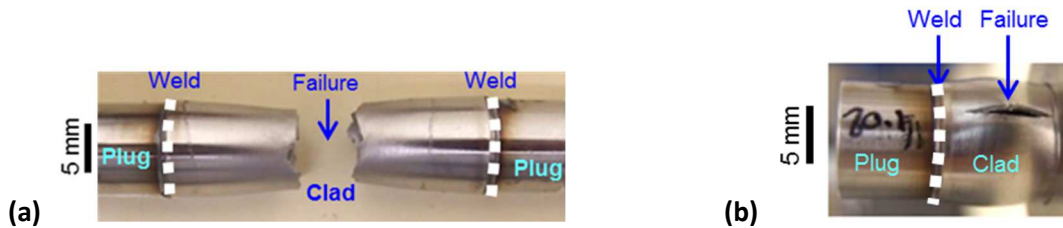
Image of a 14Cr end-plug/clad/end-plug welded sample after a tensile test (a), and image of a 9Cr end-plug/clad welded assembly after a burst test (b). The welds are located under the white dashed lines.
